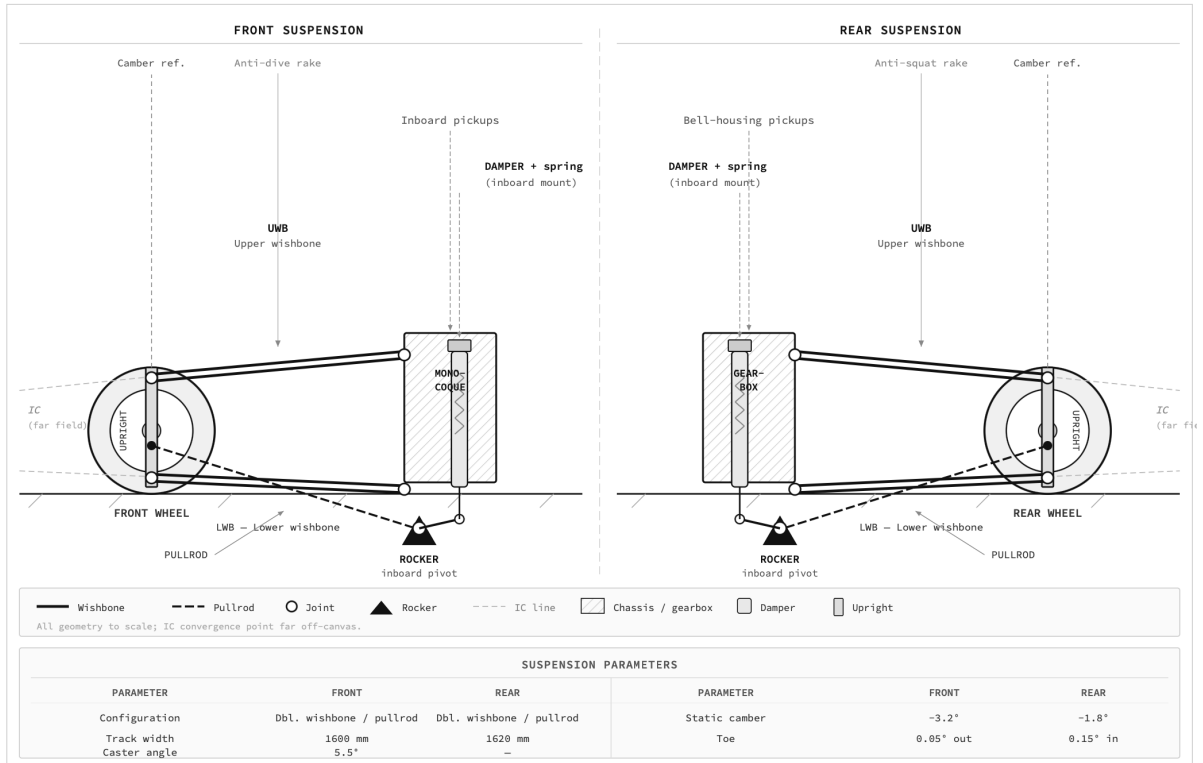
Suspension Geometry Block Diagram mapping Wishbone Layouts, Kinematic Instant Centres, Pullrod Actuation, and Inboard Rocker Assemblies.
